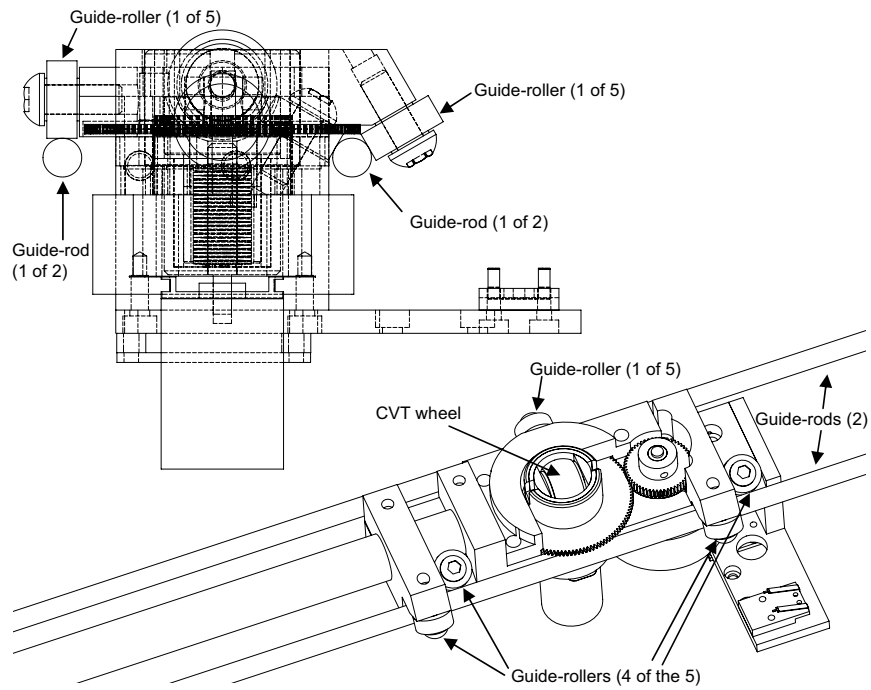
Removing the supporting structure of the linear actuation assembly in Figure 5 reveals steel guide rods for linear motion. The linear bearing consists of five cam-follower studs, two guide-rods and the CVT wheel.
